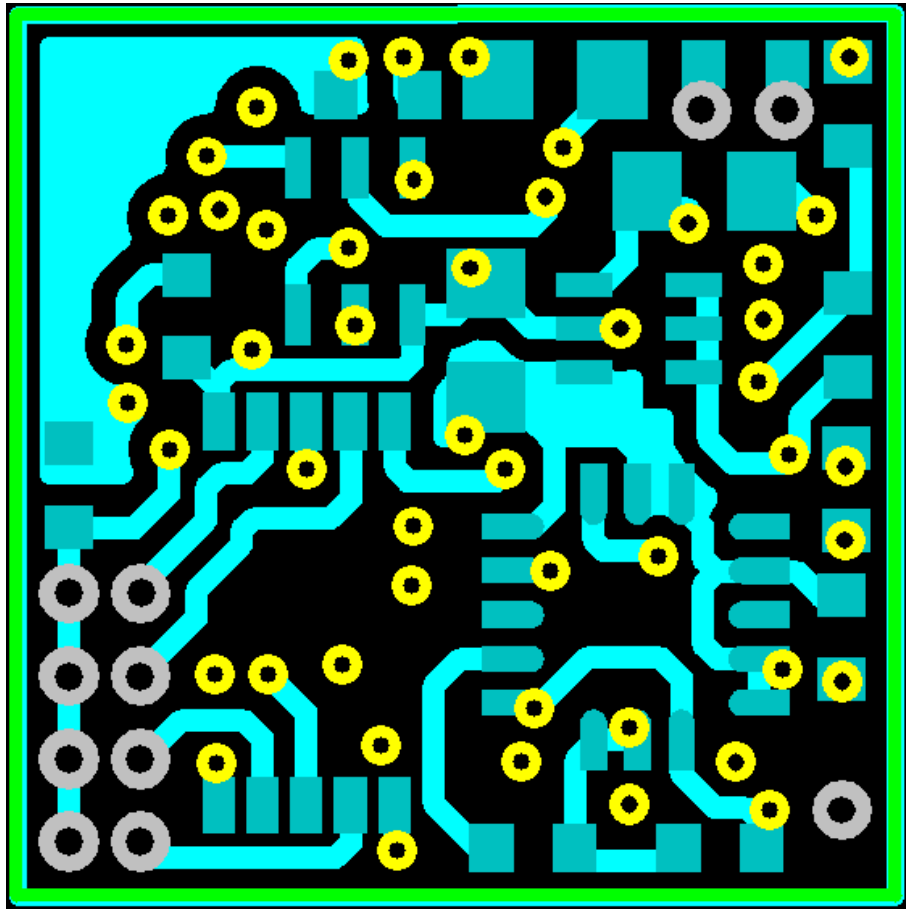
Bottom Layer PCB Layout of four channeled telemetry unit of the dimension 10 mm x 10 mm
